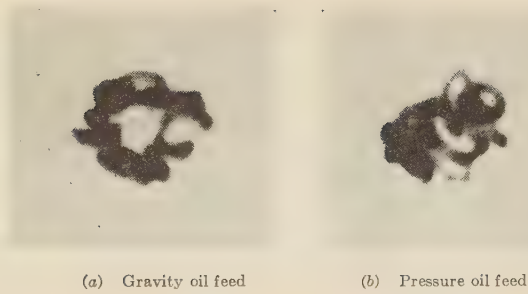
PATTERNS OF SPINDLE MOTION OF PLAIN-BEARING SPINDLE LOADED BY A SMALL BALL BEARING; $\times 10,000$
